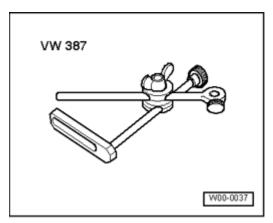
Identifying Dial Gauge Holder VW 387 Courtesy of VOLKSWAGEN UNITED STATES, INC.
